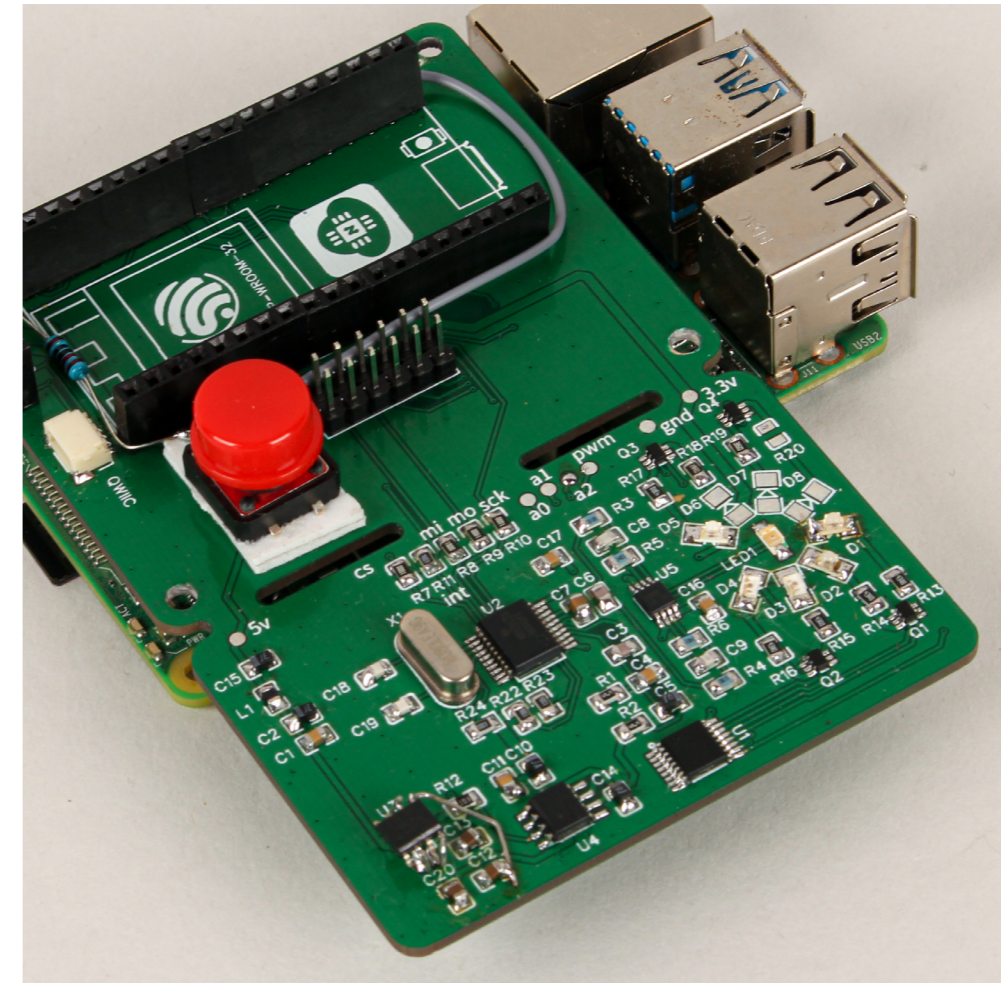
PCB ordered online with 0805 SMD components on a single side.
